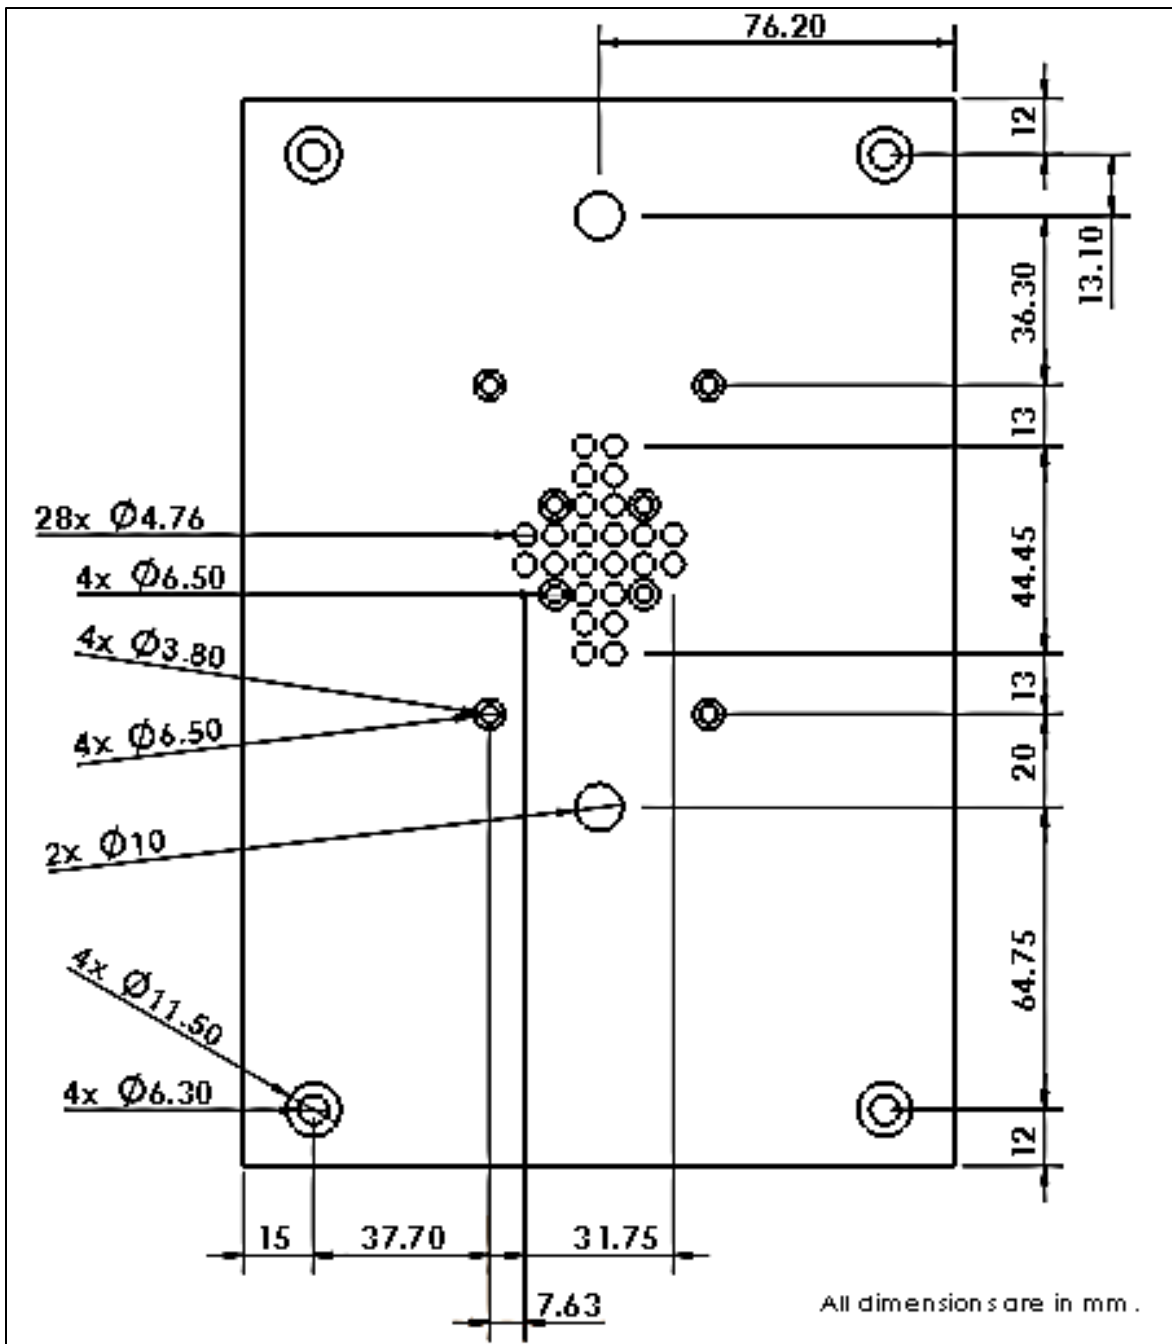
(f) Design with dimensions of sides # 1 and 3 of the payload
